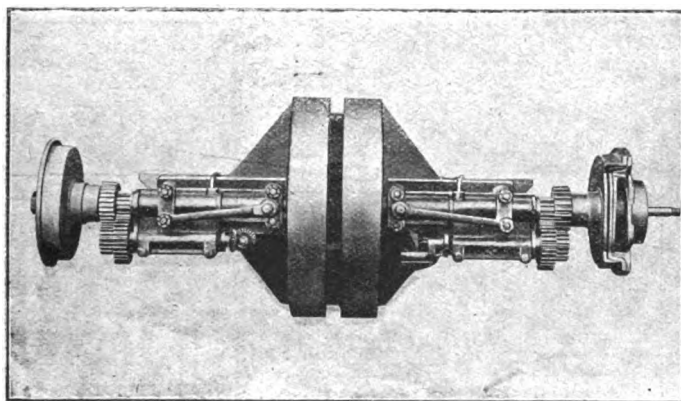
THE "MOTORMOBILE" CRANK SHAFTS AND VARIABLE SPEED GEAR.
